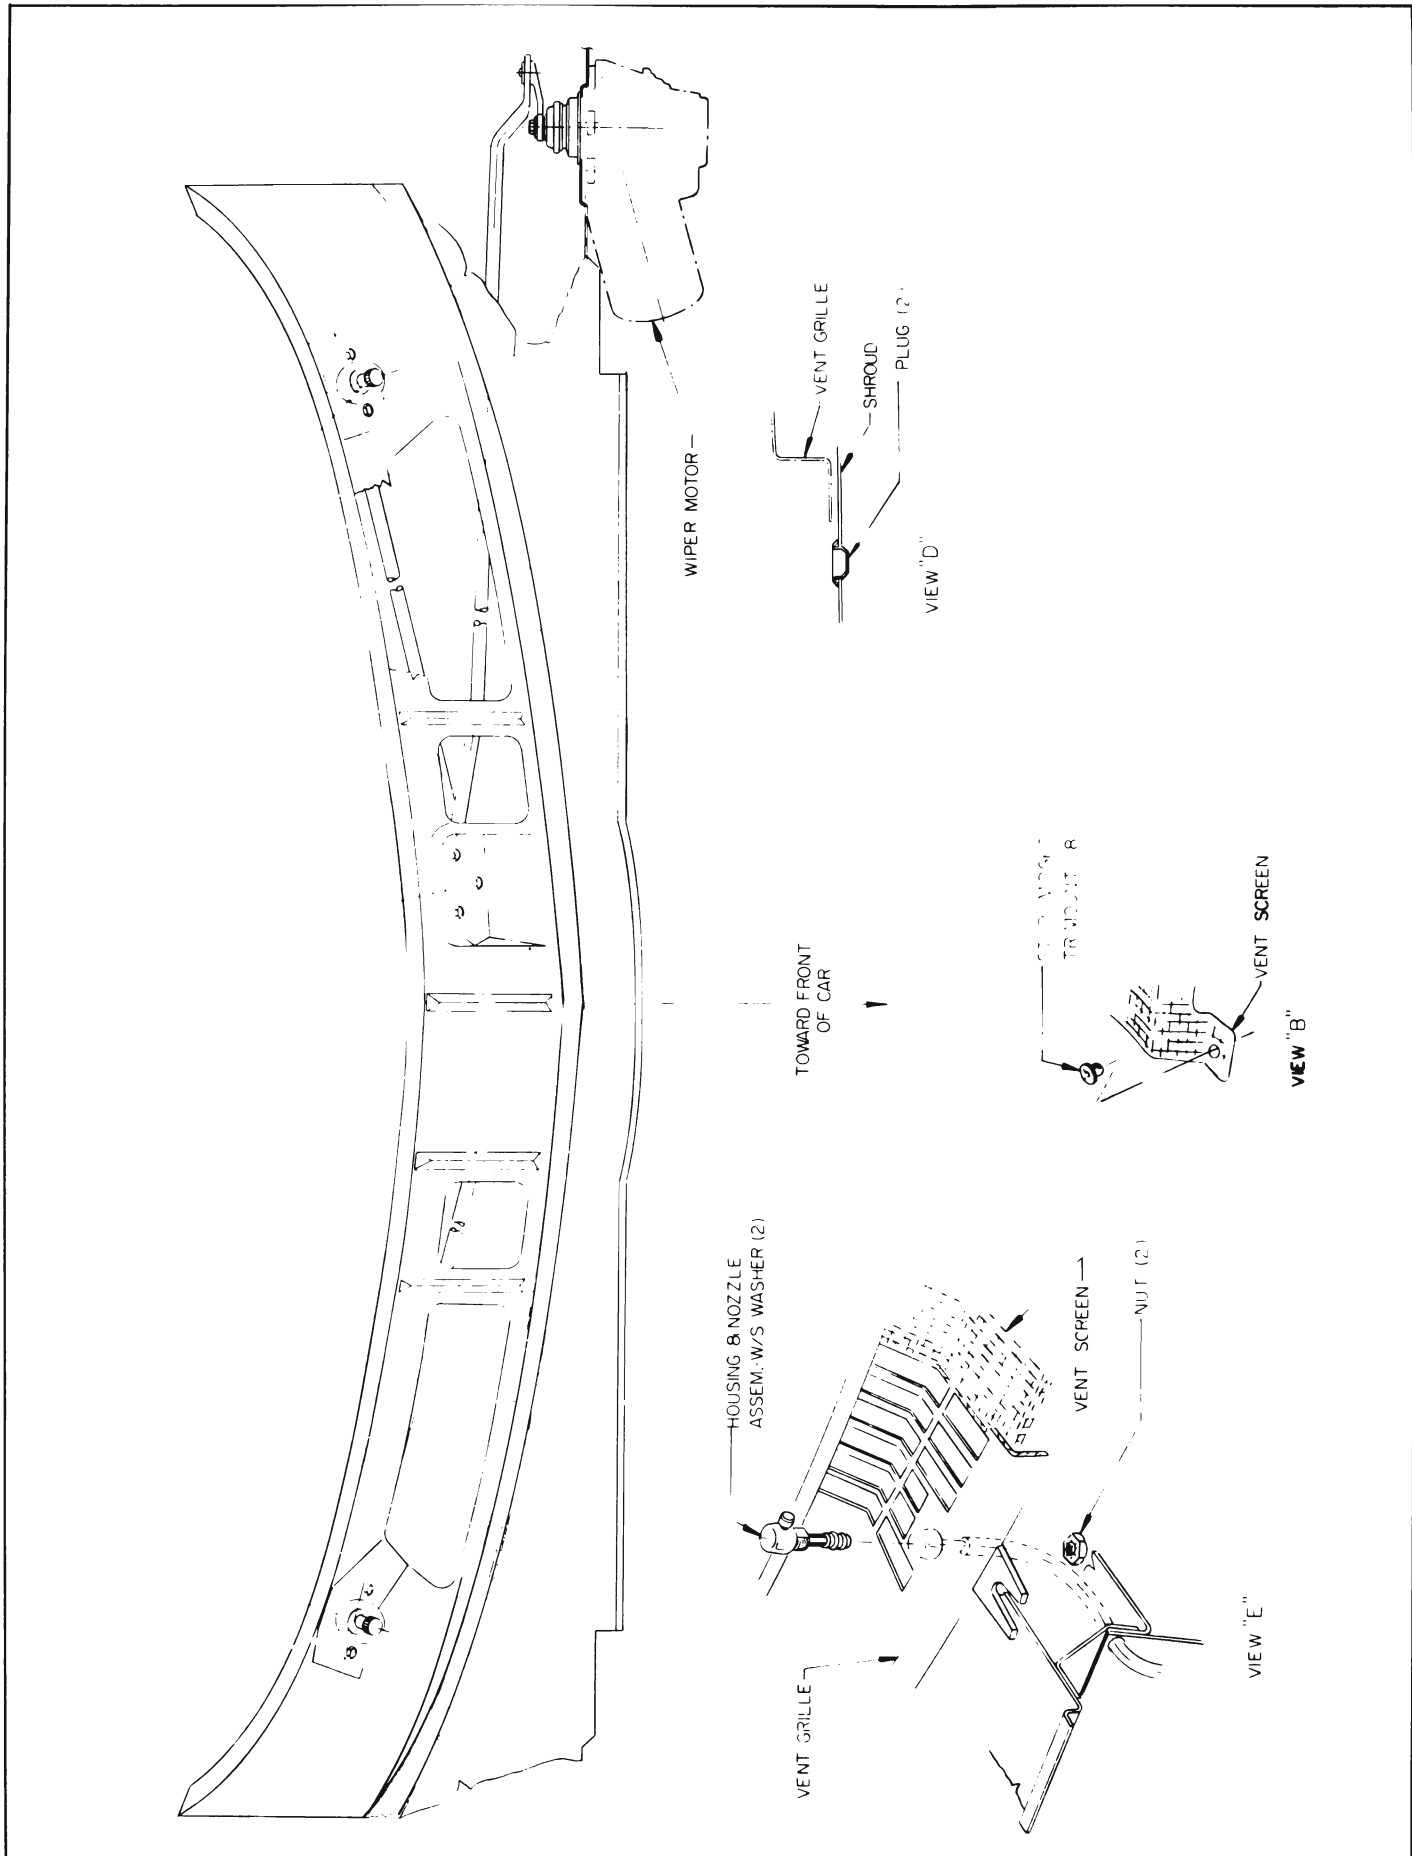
Windshield Wiper Linkage and Washer Nozzle Mounting - Riviera
